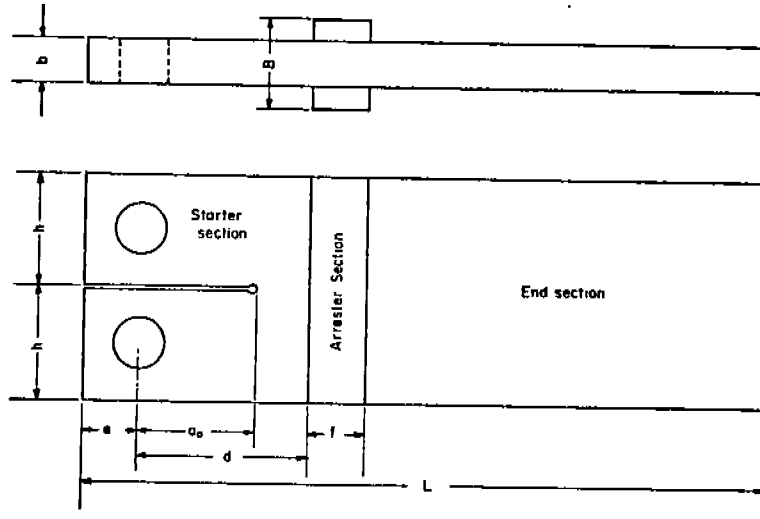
DCB SPECIMEN GEOMETRY FOR ARRESTER CALCULATIONS
